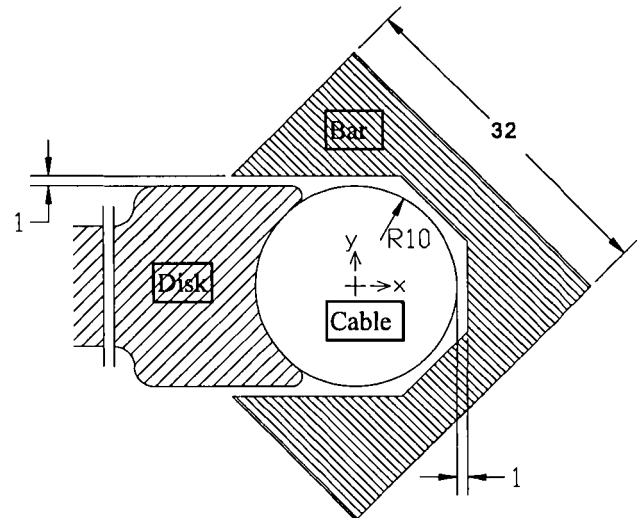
Cross-section of the cable around the cable guide disk inside the bar.
